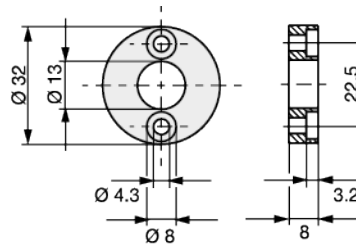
Installation dimensions of BTL-P-1013-4R magnet
